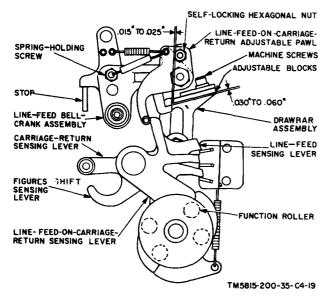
Adjustable block and pawl adjustment (TT-98C/FG).
